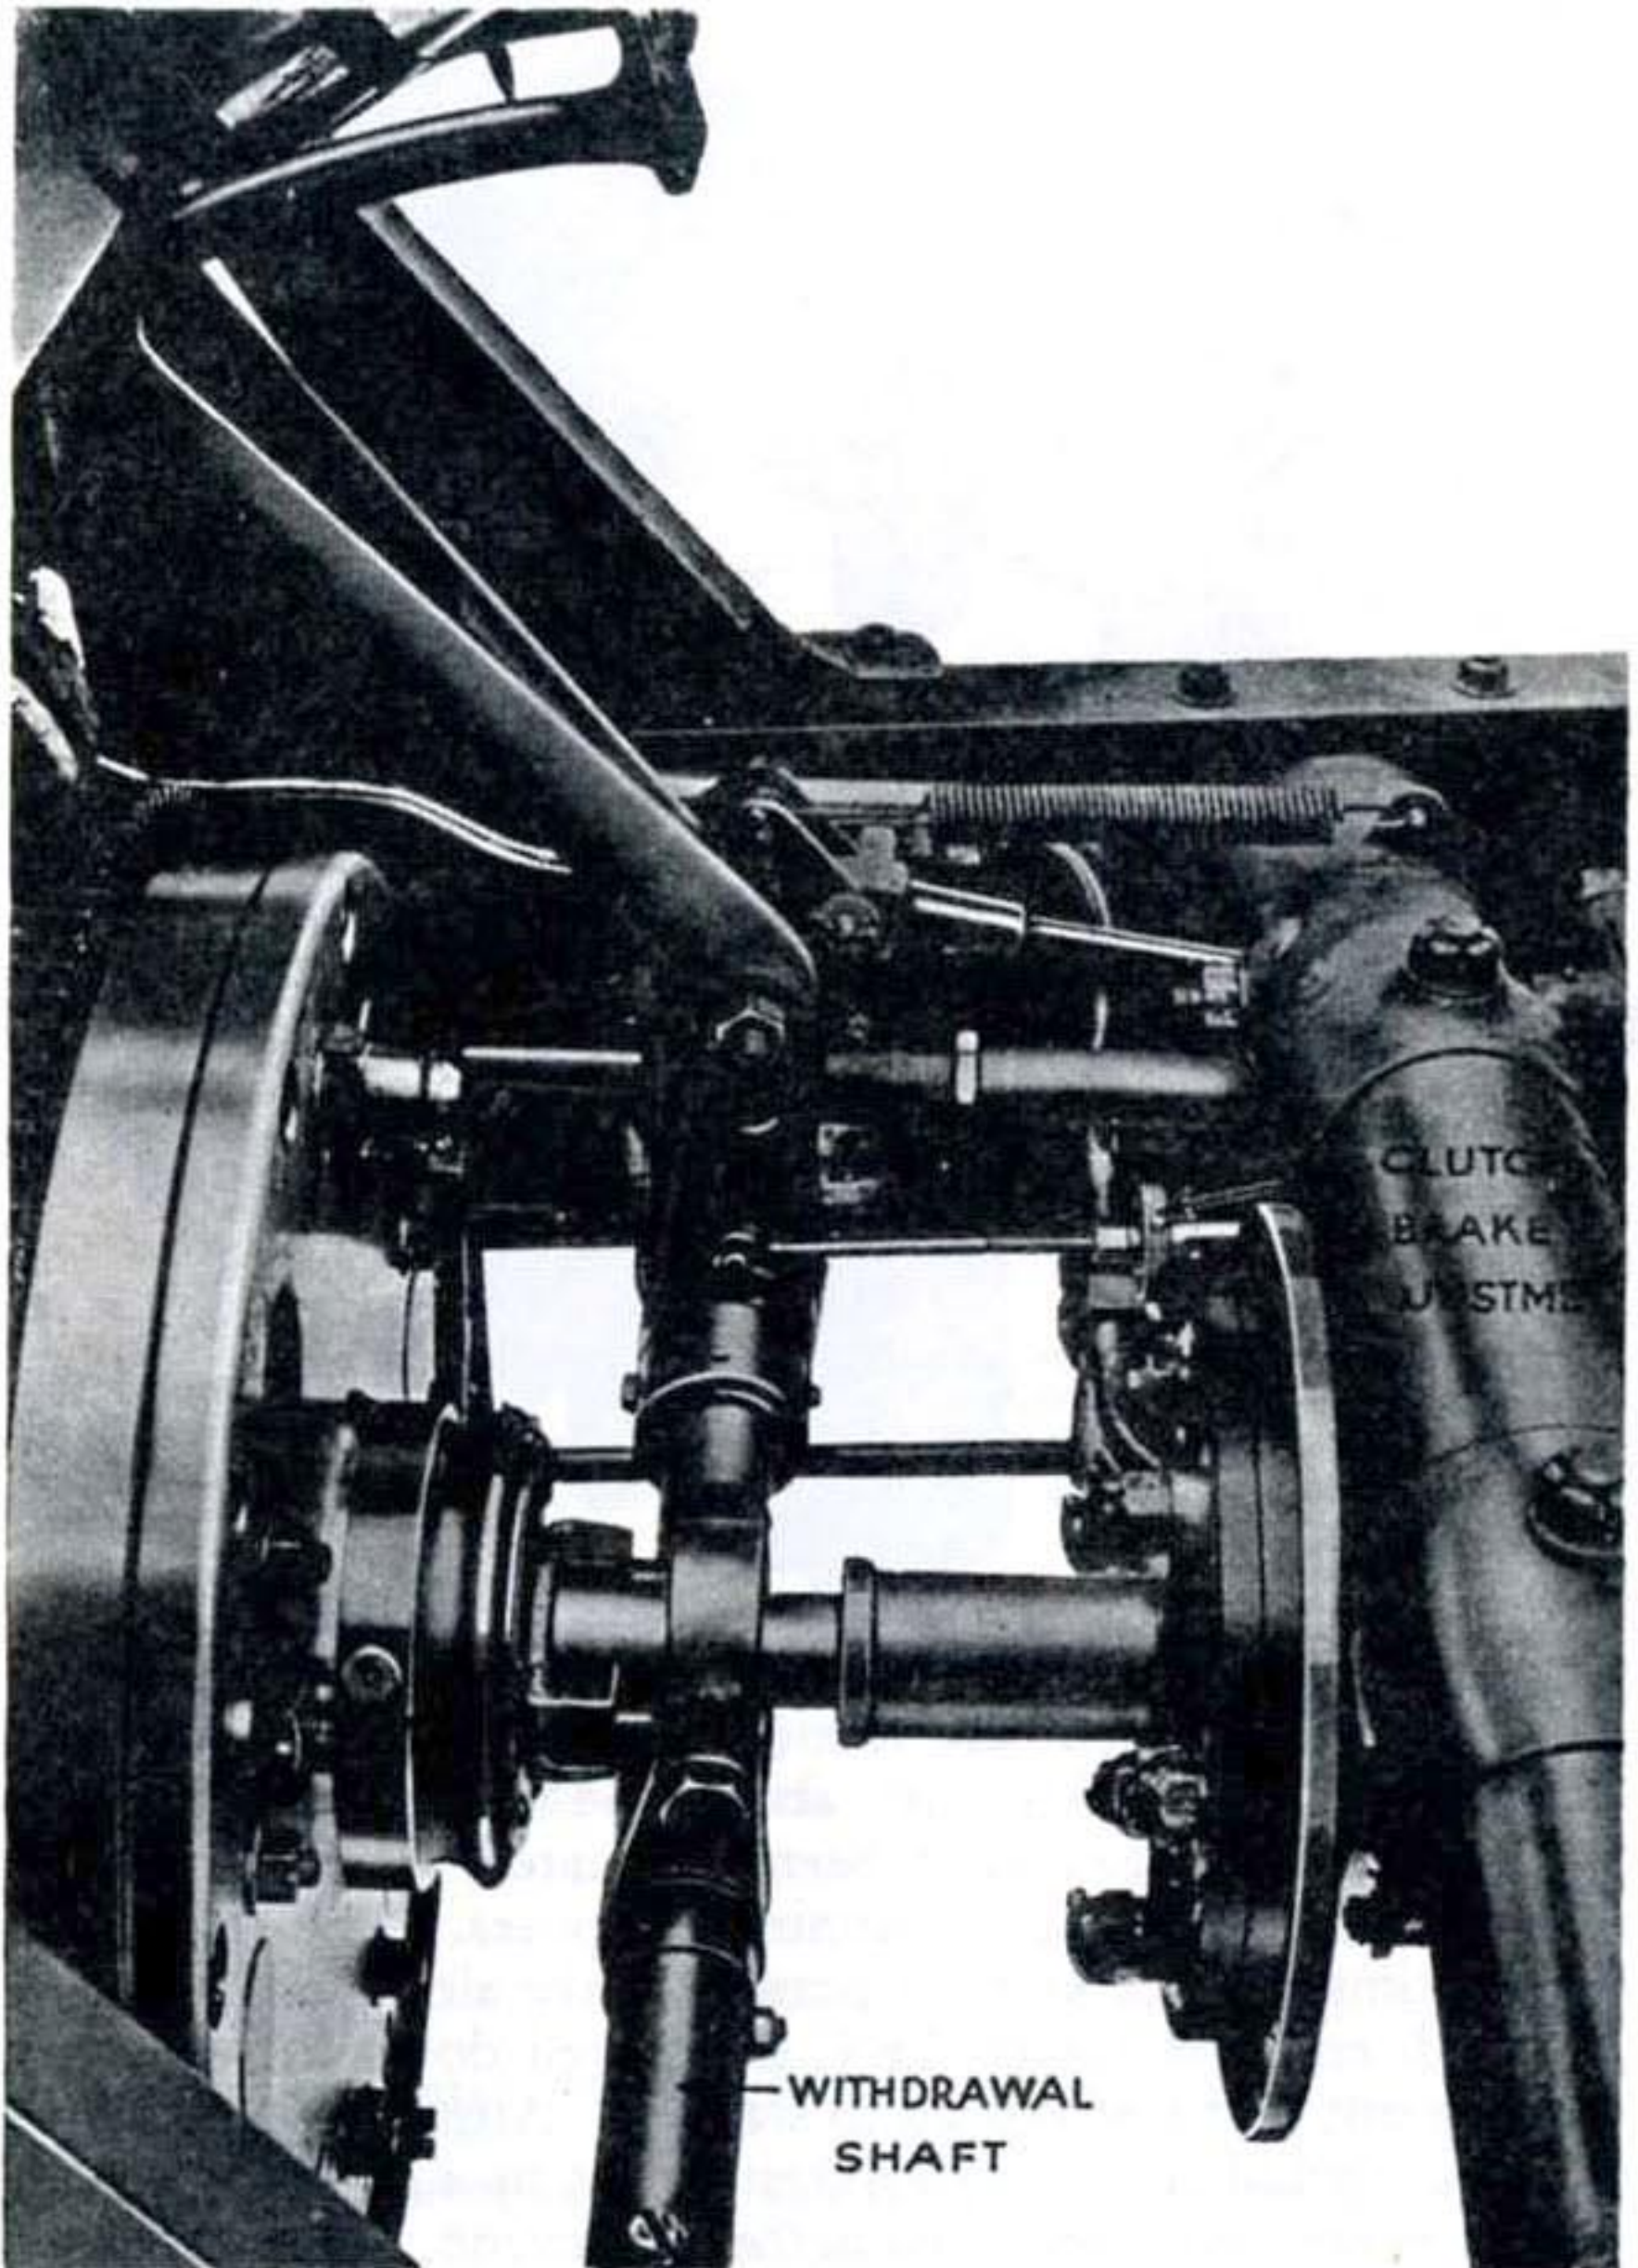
GENERAL EXTERIOR VIEW OF CLUTCH AND WITHDRAWAL GEAR.
